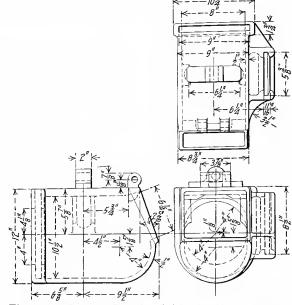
Journal Box for 5½ in. by 10 in. Journals and Cast Steel Side Frames. Pittsburgh Equipment Company.
